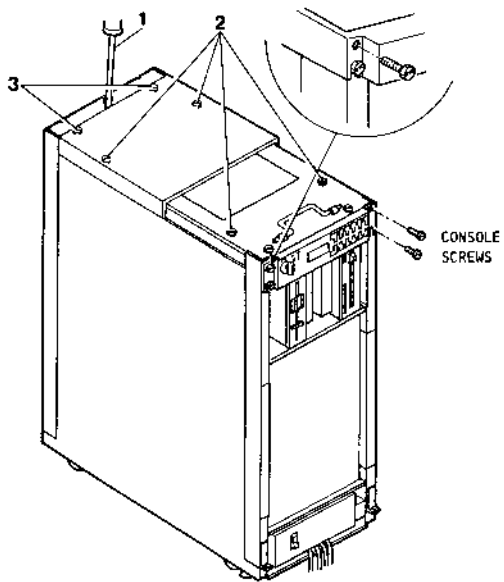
Removing the SBO Cabinet Panels from the Front
